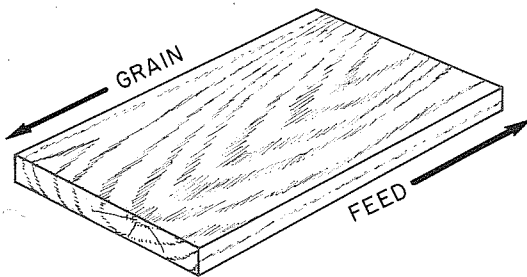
Feed stock into surfacers so the cut will be made with the grain. This will produce a smoother cut.
